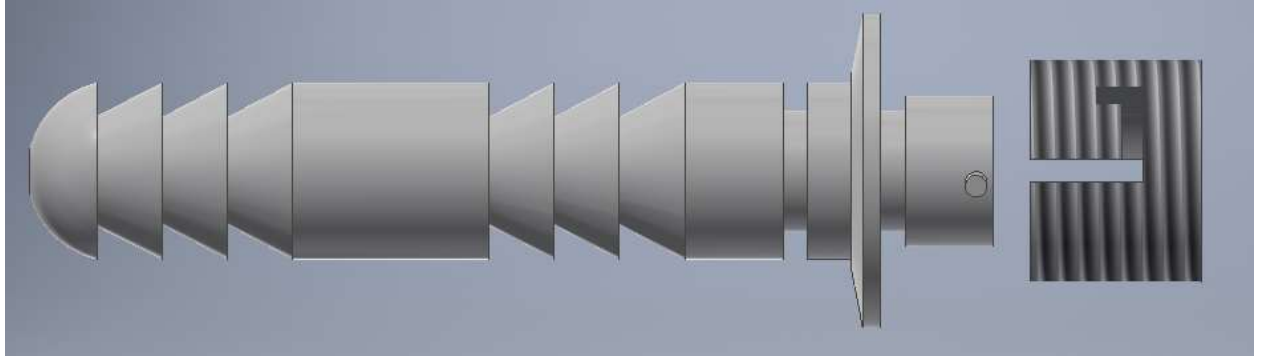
Cross-sectional view of standard locking pin inserted into shuttle lock
